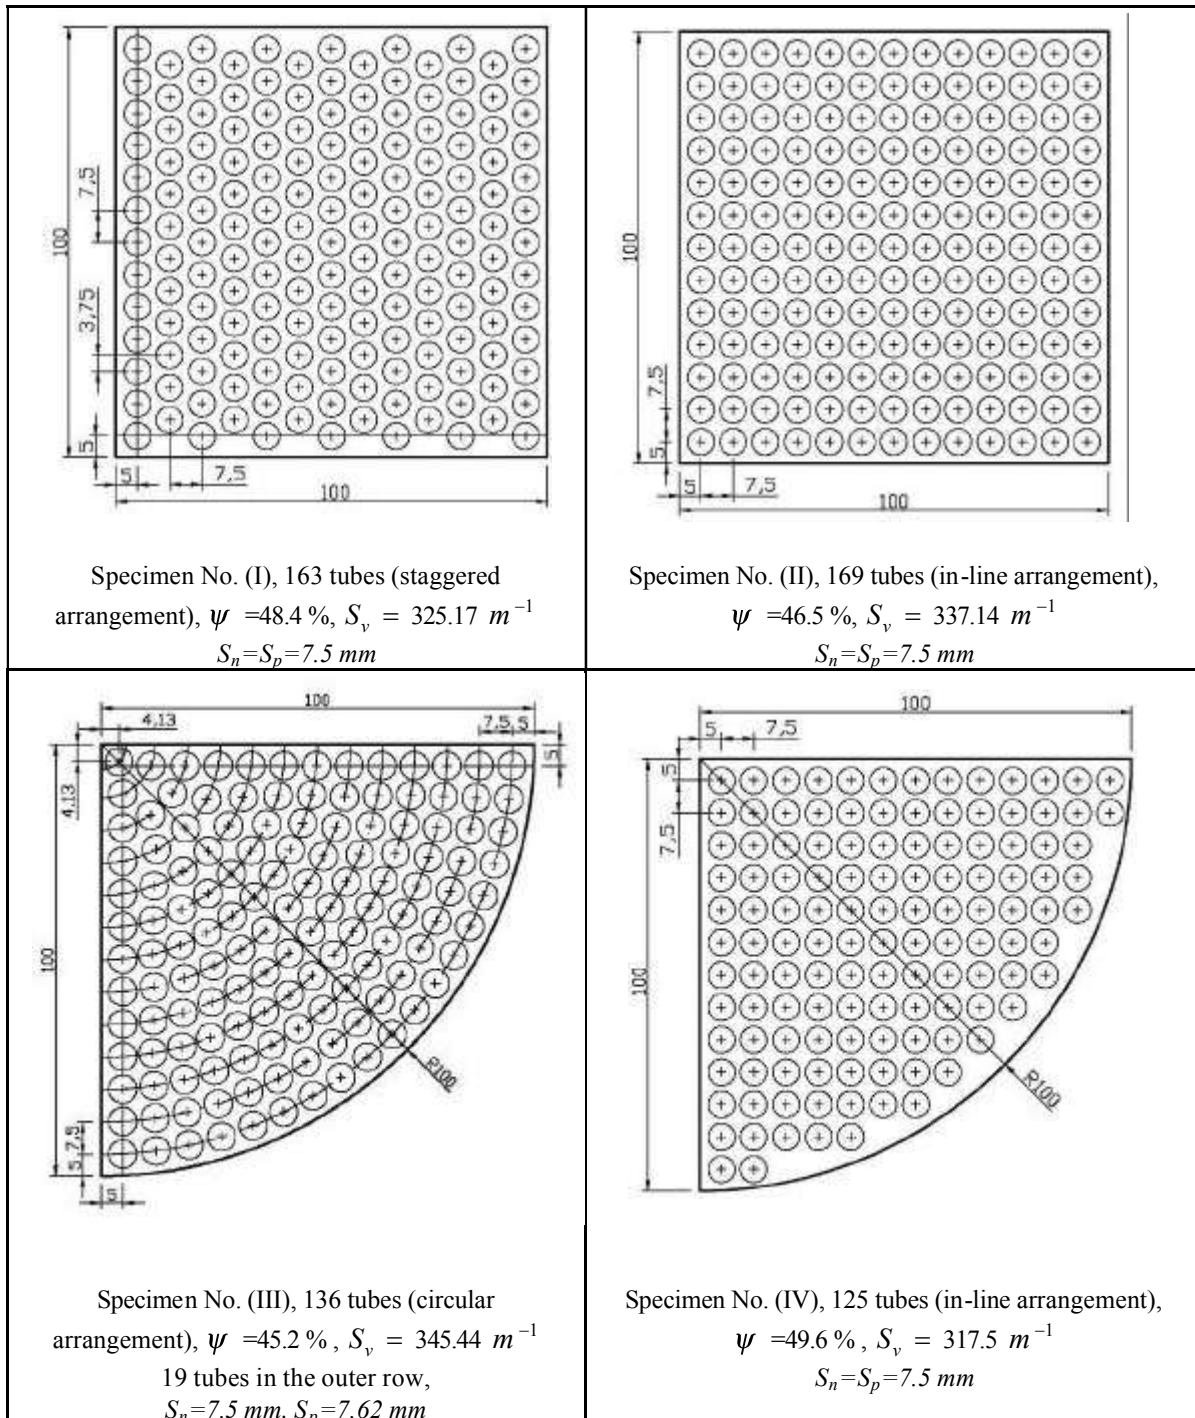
Geometrical specifications of the test specimens No. I, II, III & IV
